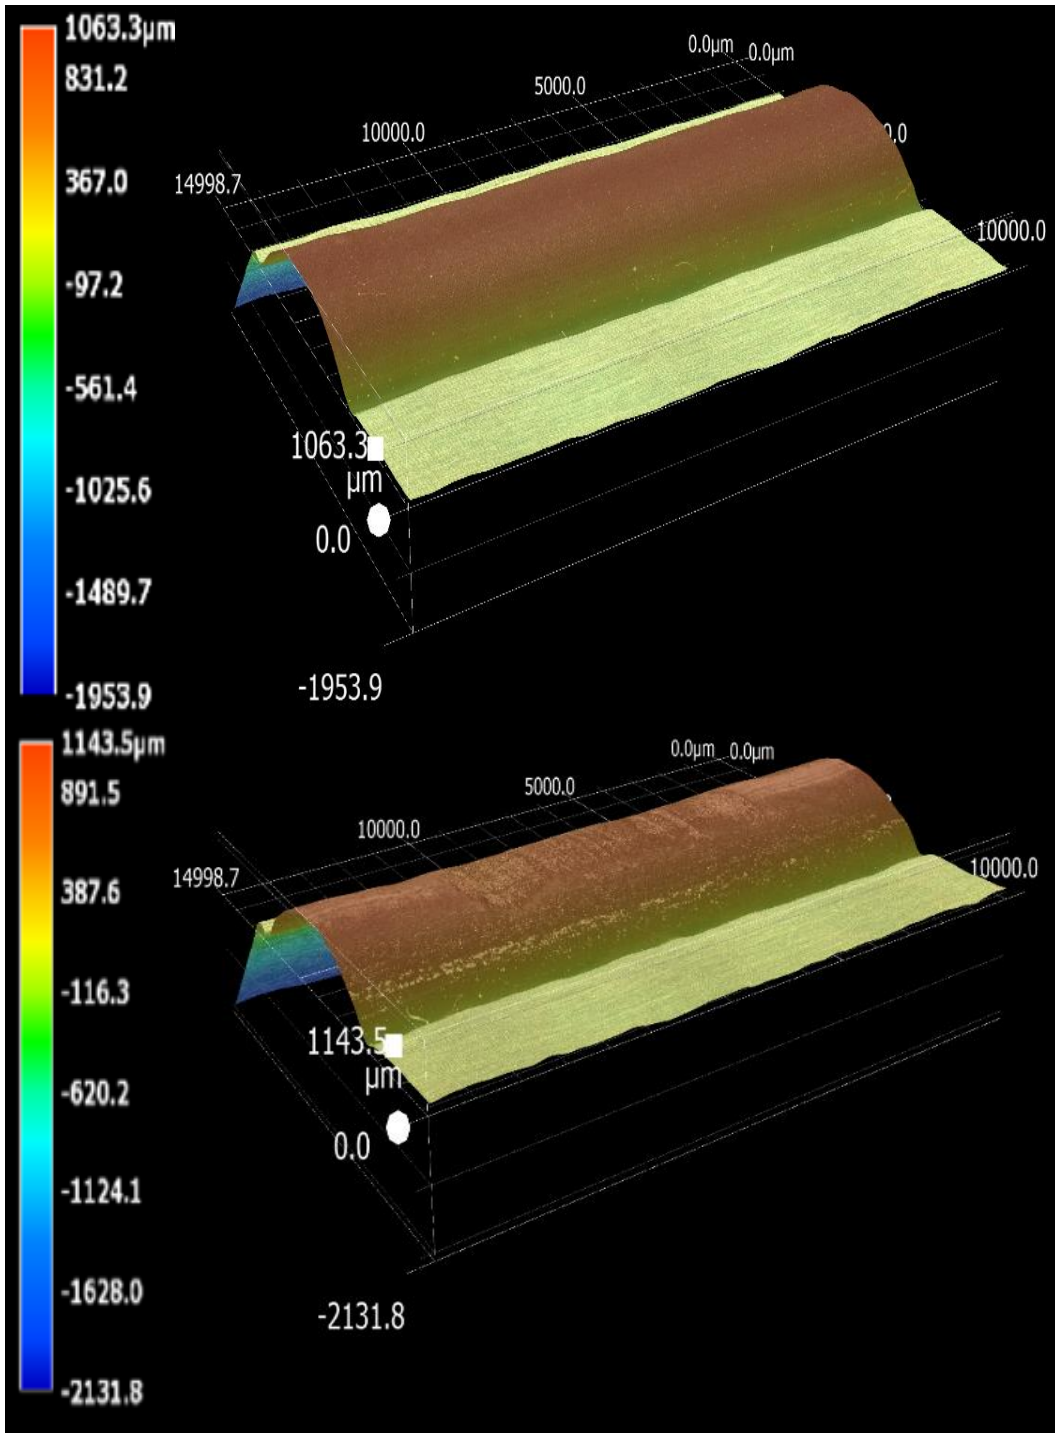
3D profiles of Recoater arm no. 1 before (top) and after (bottom) the print
